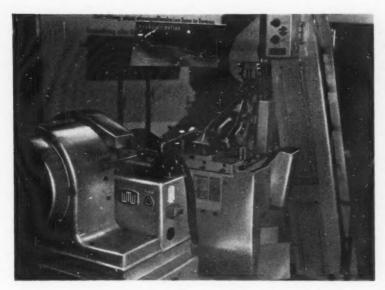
Type GWB10 Flat Die Thread Rolling Machine Arranged to Roll a Thread at Each Stroke of the Die Slide
